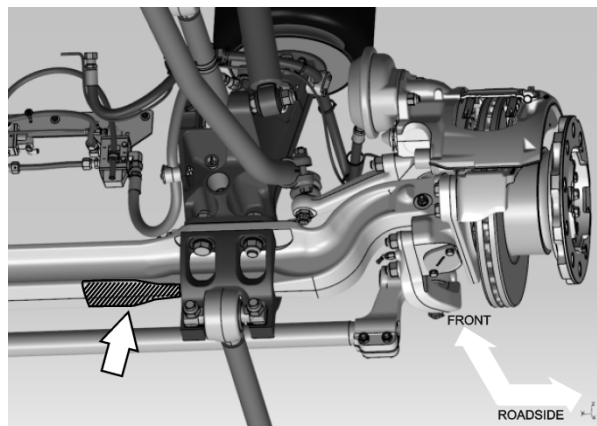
I-BEAM AXLE HOISTING POINT - ROAD SIDE
